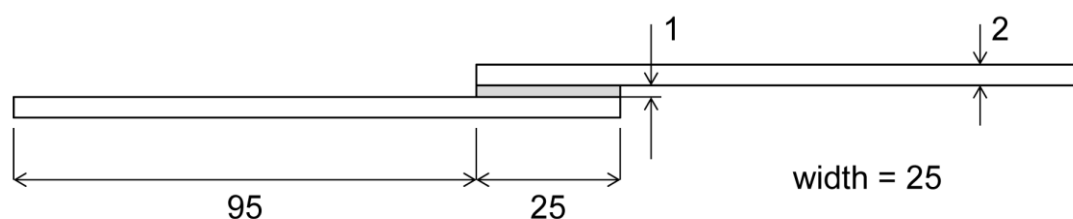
Single Lap Joint specimen (dimensions in mm)
